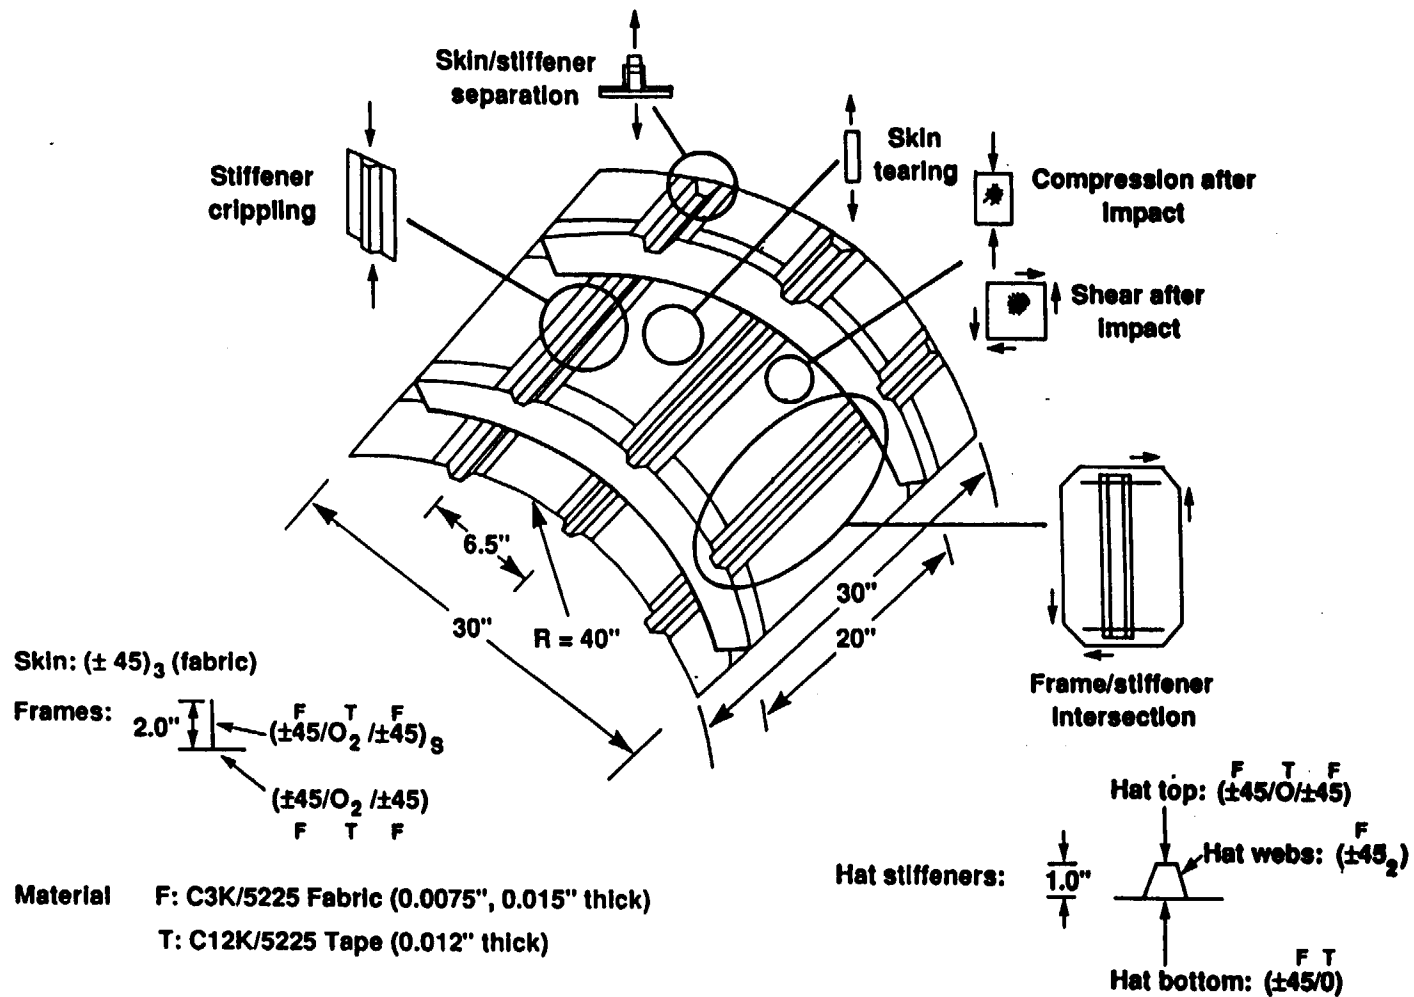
BUILDING BLOCK TEST SPECIMENS AND FULL-SCALE PANEL
